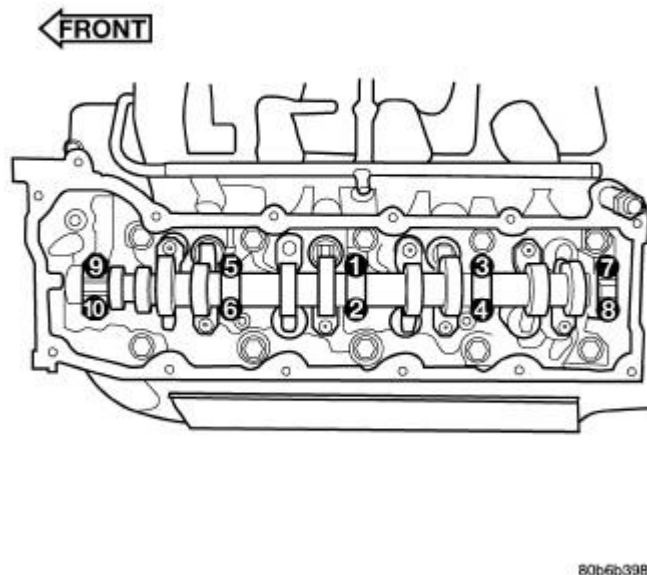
Removal/Installation Sequence Of Camshaft Bearing Cap Retaining Bolts
